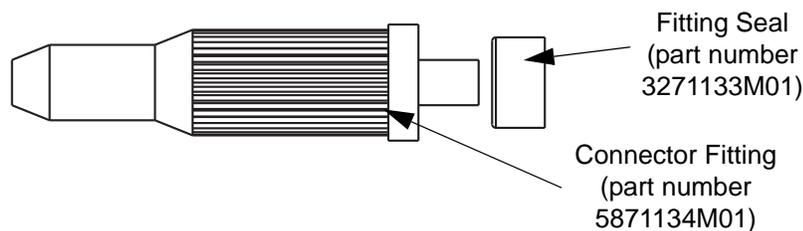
Connector Fitting - Fitting Seal Pump Connector
